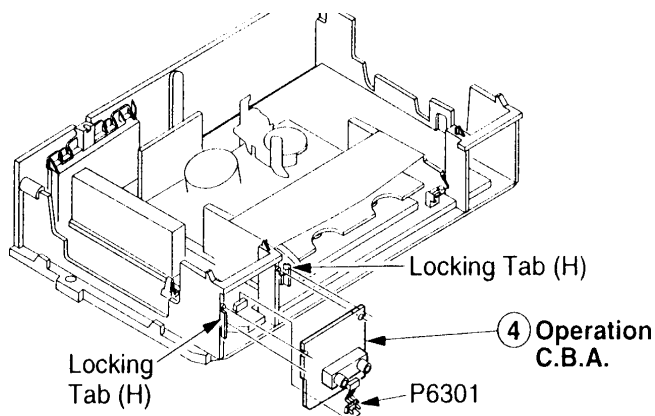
Operation Circuit Board (Model VR632HF) Removal
